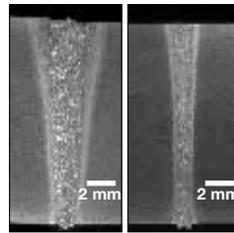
Laser welds in 11.2 mm thick X70 pipe steel
